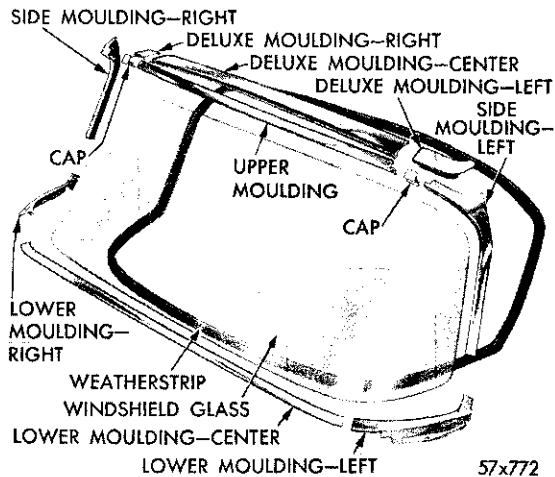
Windshield and Moulding Assembly (C-75, C-76)
